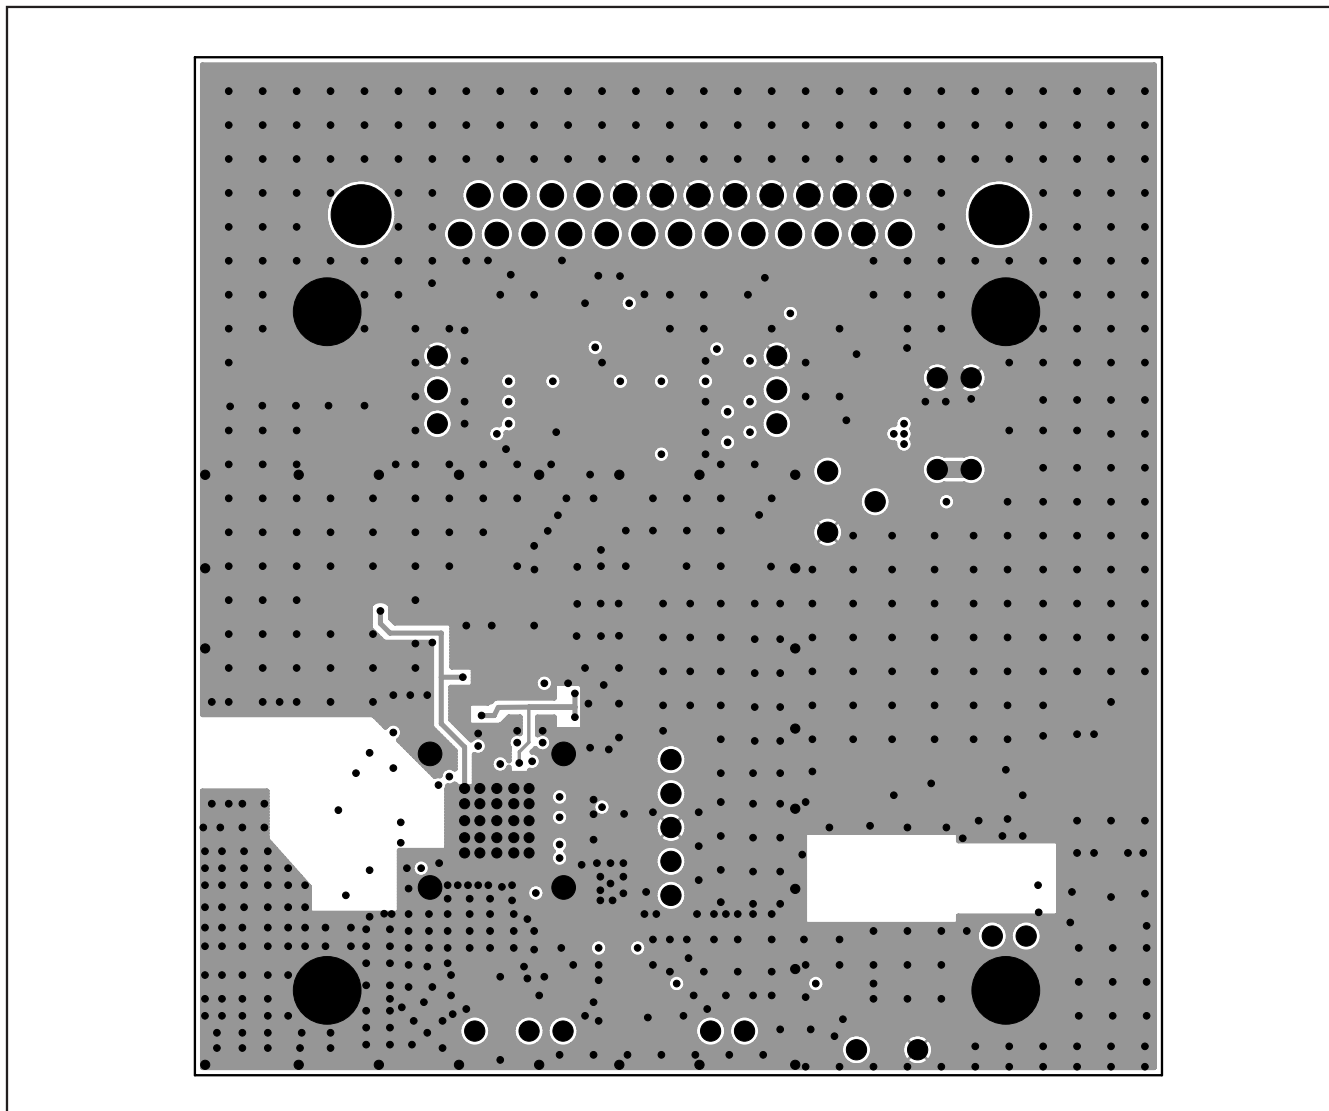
MAX3541/MAX3542 EV Kits PCB Layout—Inner Layer 2
